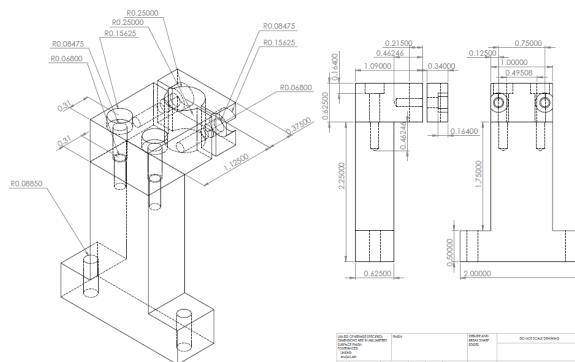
Schematic of clamp used to support and prevent rotation of the high pressure cell assembly.
